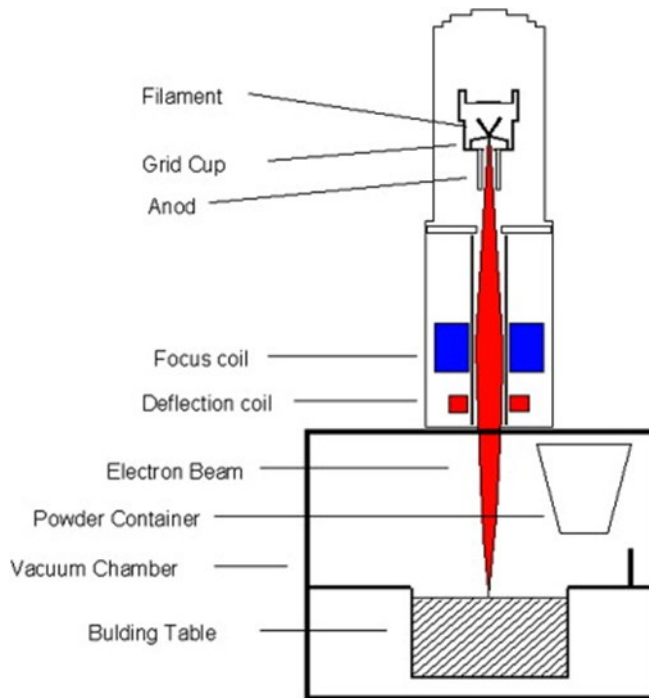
Schematic drawing of an Arcam EBM machine [28]
